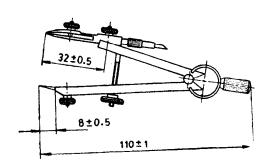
Dimensions for Spring Bow Compasses with Side Screw
